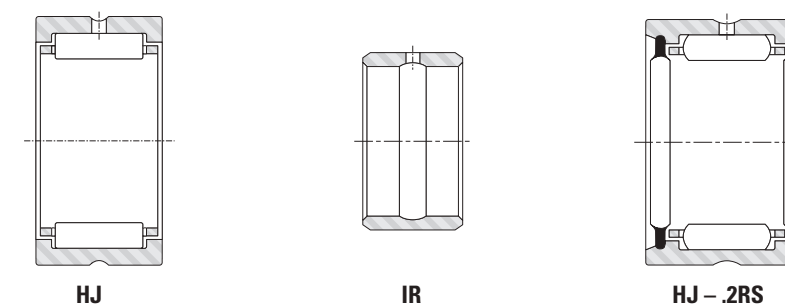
Construction of inch series heavy-duty needle roller bearings
